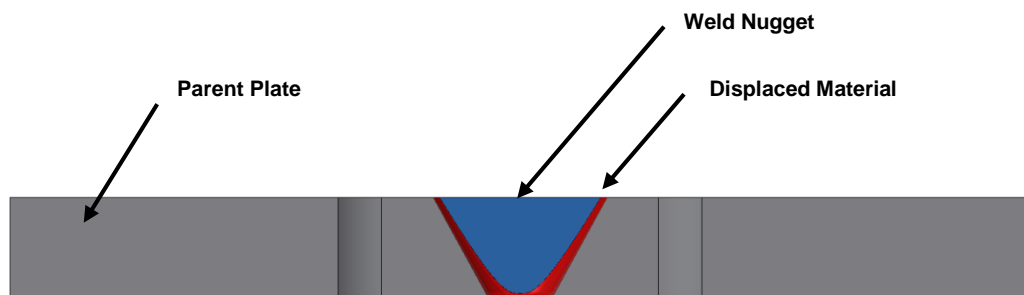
Tensile Sample showing Weld Nugget and Displaced Material
